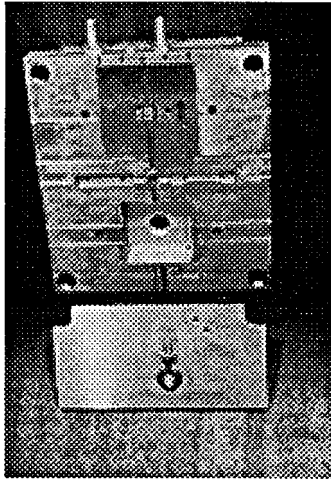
Photograph of wax pattern mounted to the milling/casting plate along side the base plate.
